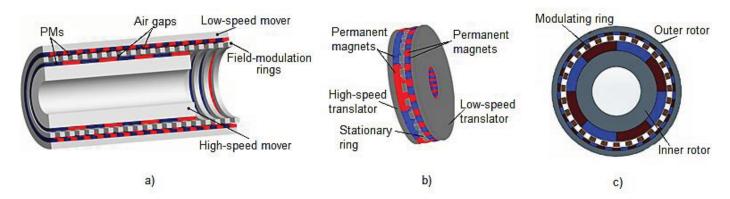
Field-modulated magnetic gears a) linear magnetic gear [18b) axial magnetic gear [24], c) coaxial magnetic gear (CMG) [19]
